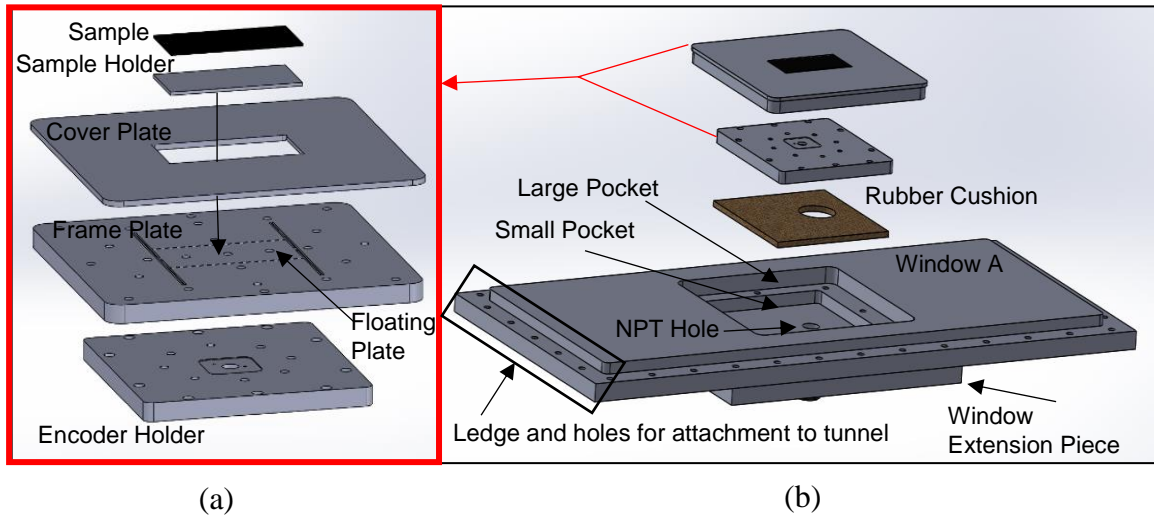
Window panel A shown in 3D CAD layout. (a) Exploded view of the shear stress sensor and its accessory components. (b) Exploded view of the window panel assembly; emphasizing the structural design of window panel A.
